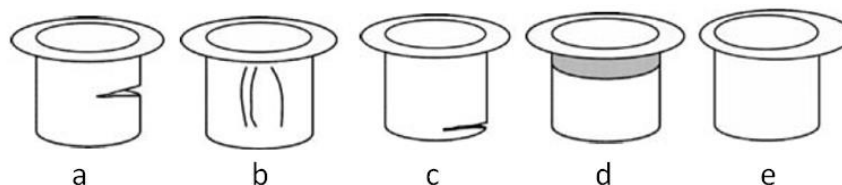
Poor lubrication influences a) cracks, b) sec. wrinkle/pucker c) crack near bottom d) drawing marks, e) asymmetrical flange [2]
